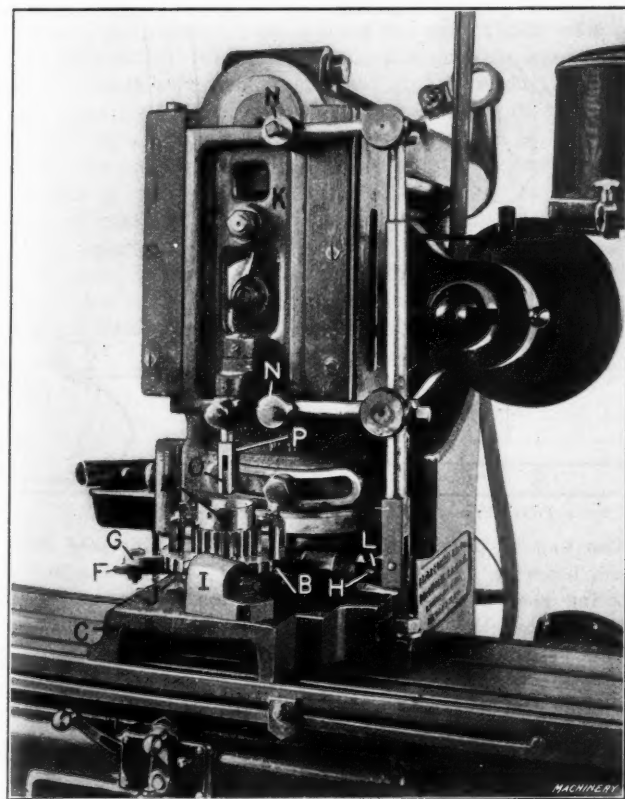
Automatic Indexing Fixture in Position on Brown & Sharpe Milling Machine
